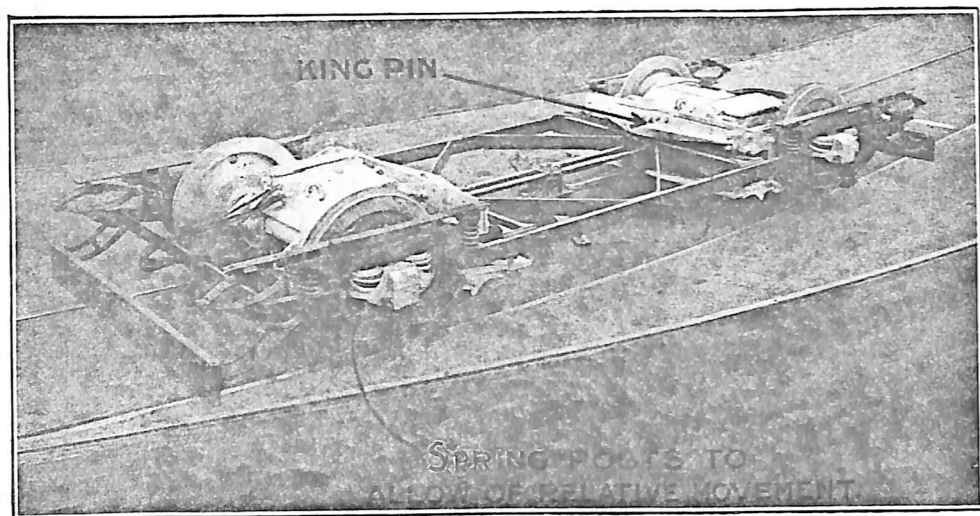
Under-carriage of Car. Gear painted white pivots on King pin.
